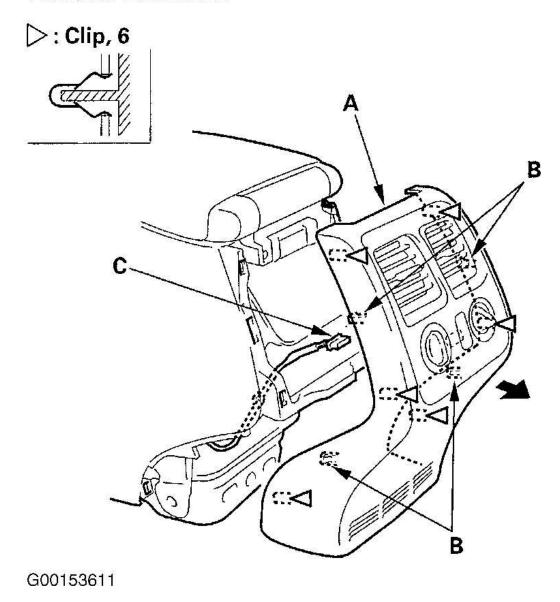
Removing Rear Heater-A/C Control Unit Panel Courtesy of AMERICAN HONDA MOTOR CO., INC.
